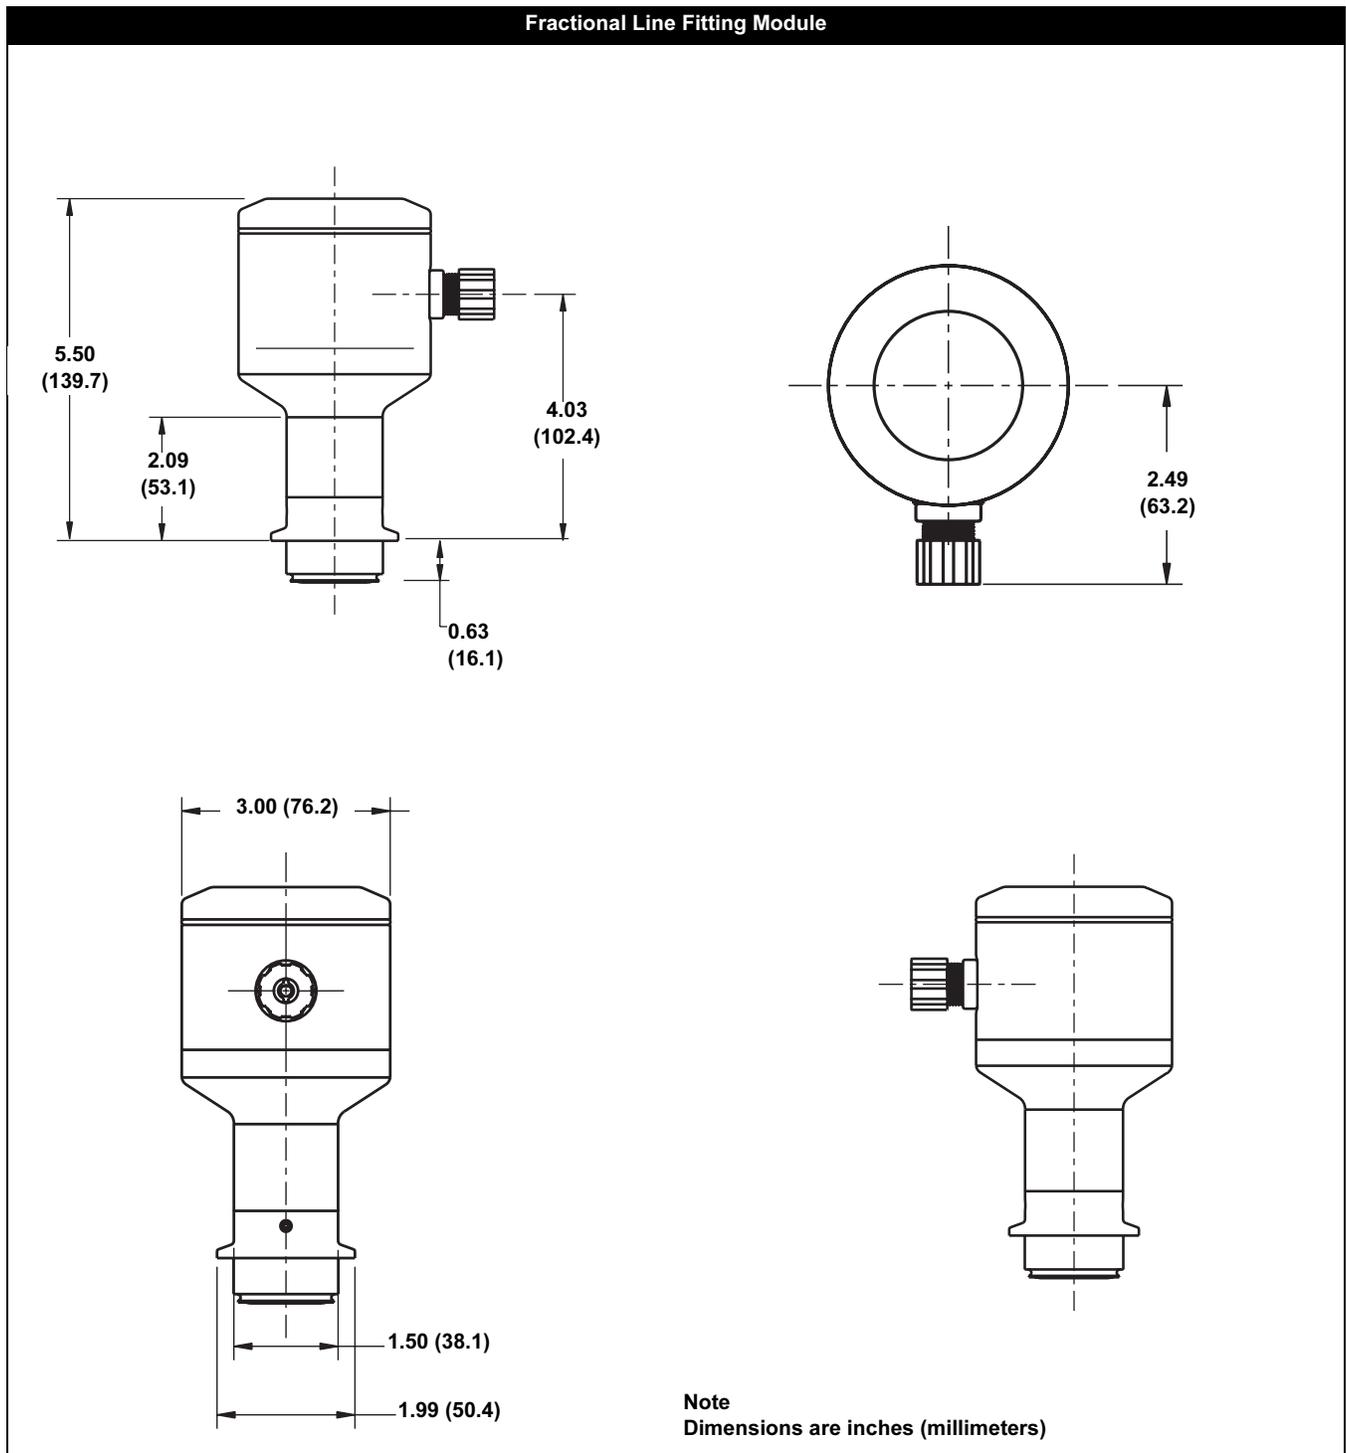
Dimensional Drawings for the Rosemount 4500 Hygienic Pressure Transmitter
